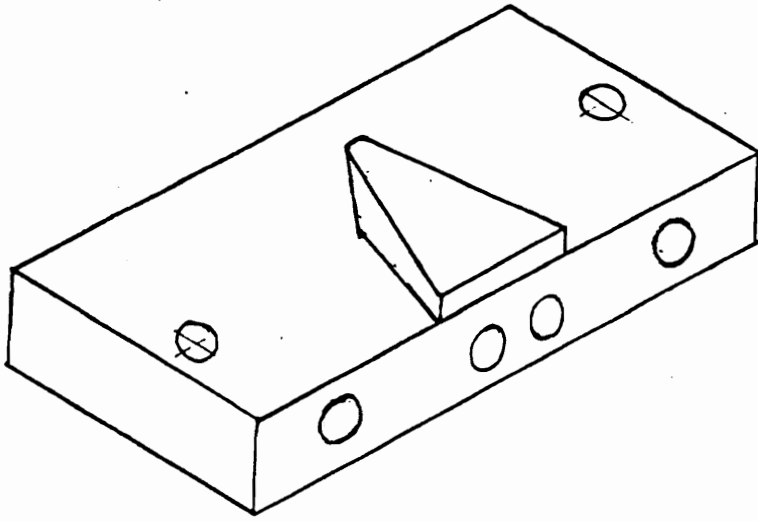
(a): Isometric view of the top half of the inlet section (viz. inlet-top section).
